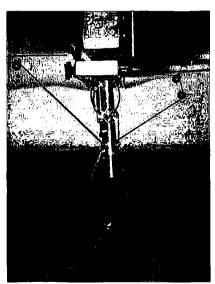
Photo D. Forward landing gear assembly before final anodizing. A hydraulic cylinder clamped to tensioned stainless cable rotates a teflon-lined collar, which couples steering inputs via the scissors assembly to the spindle bearings that carry the wheel. A column of elastomeric bumpers provides 8" of suspension travel with a 4G limit. The entire strut is retracted and extended by lines, driven by levers at the gunwales, which also add hydraulic control inputs to rotate the wheels into operating position.
